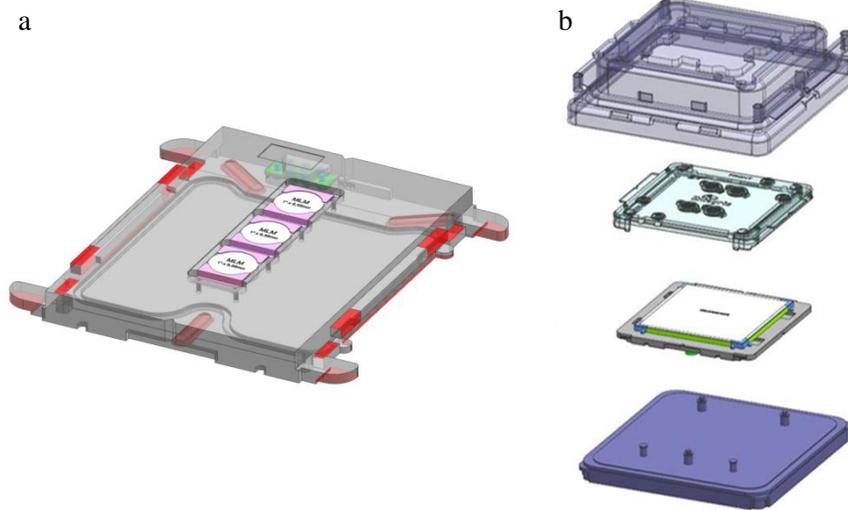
Samples handled in EBL2. a) Custom sample holder for exposure of small samples; b) EUV mask on inner pod base plate.
